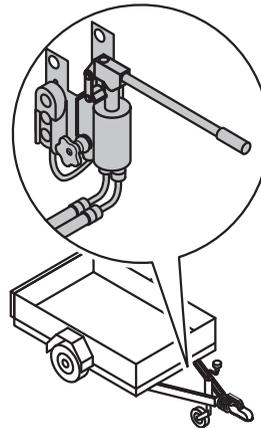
Basic version of electrohydraulic pump incl. emergency hand pump
